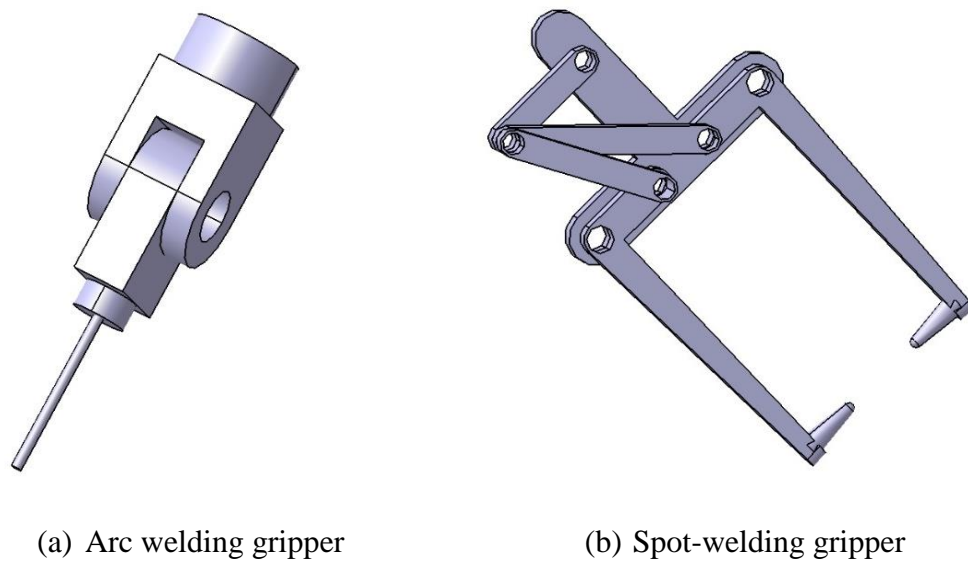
Grippers for arc welding and spot-welding
